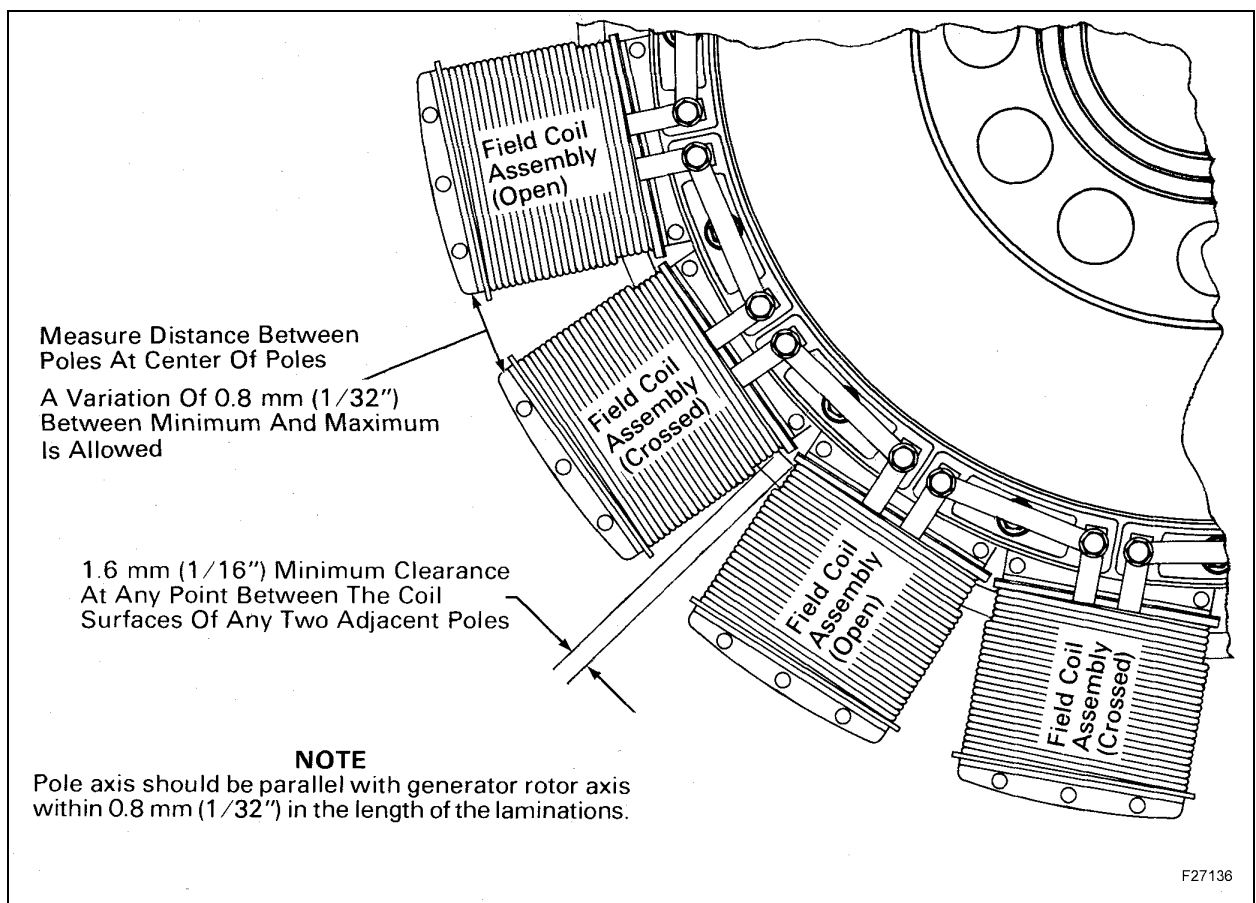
CA Type Alternator Rotor Pole Assembly
